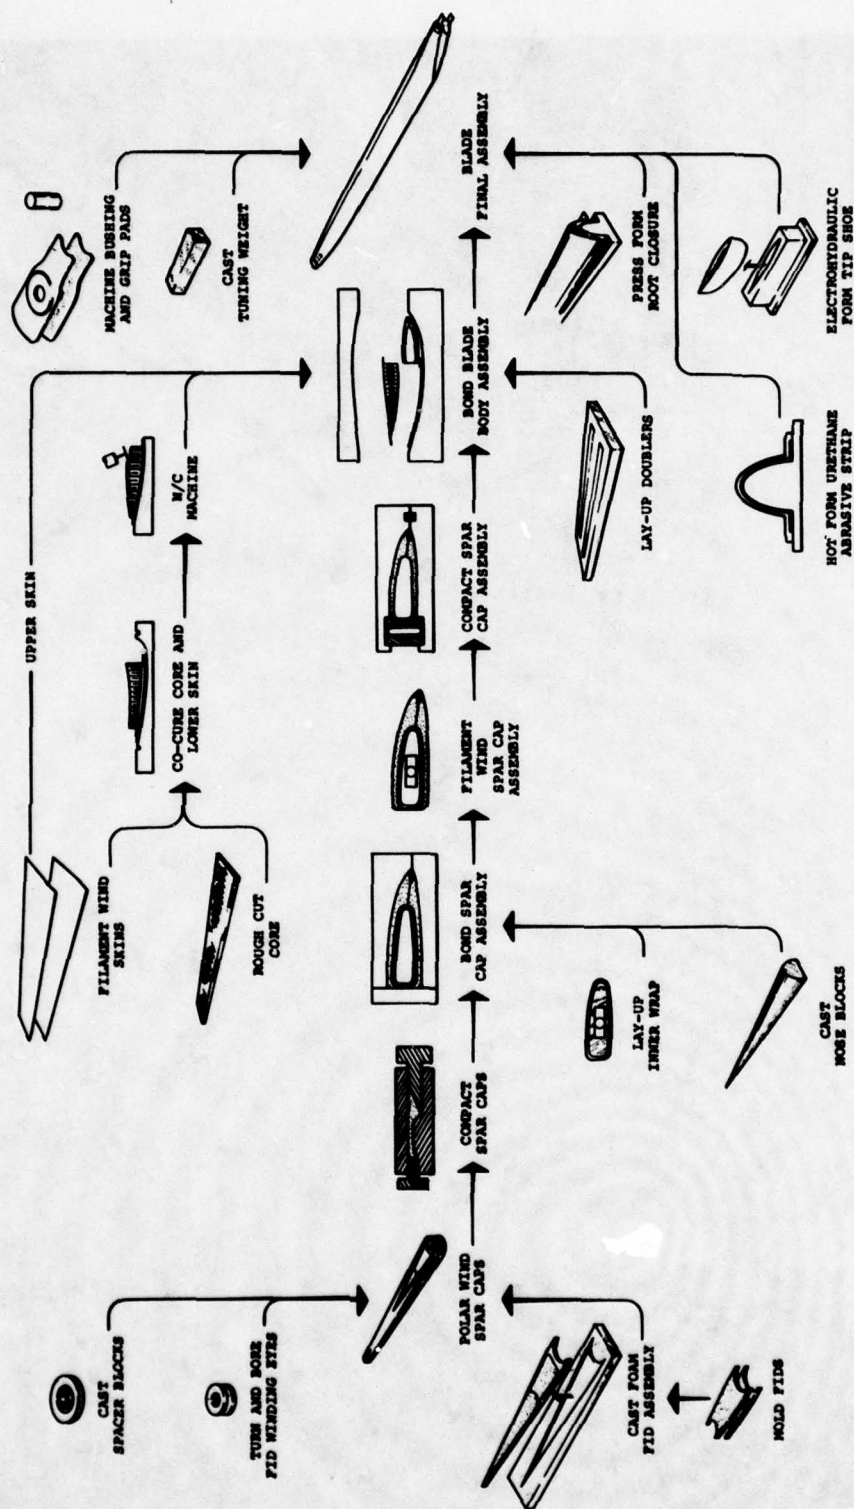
OH-58 composite main rotor blade manufacturing flow sequence.
